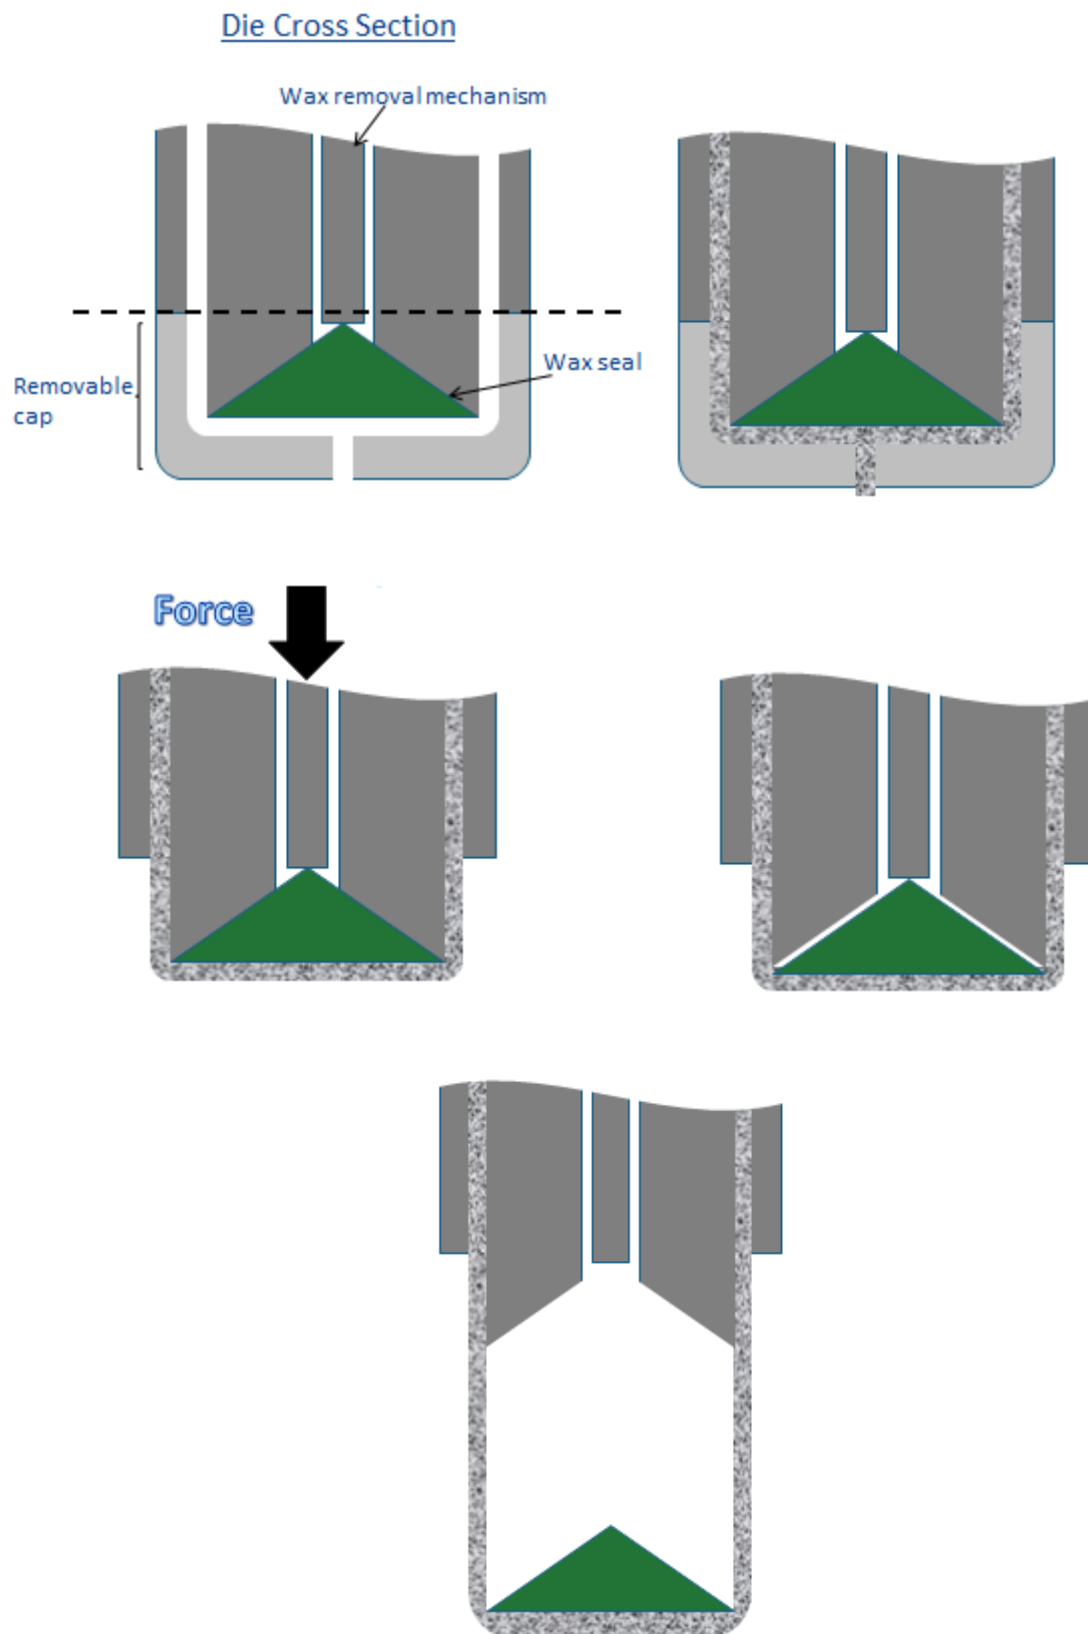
Set of diagrams to illustrate closed end mechanism, from top left to bottom centre, showing the die filling, the removal of the cap, the applied force and opening of air channels to allow extrusion to continue
